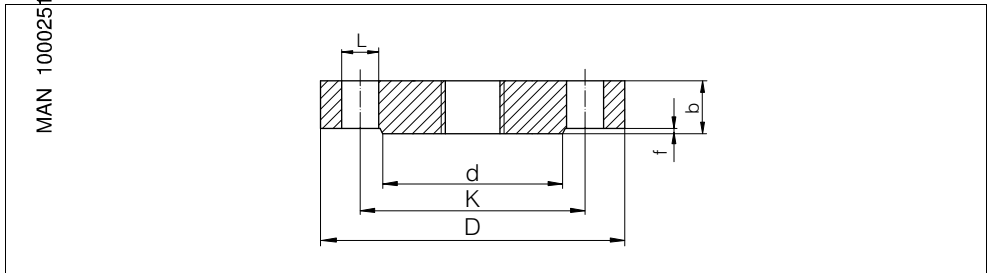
Dimensions - EN flange EN 1092-1 (seal ledge B1)
